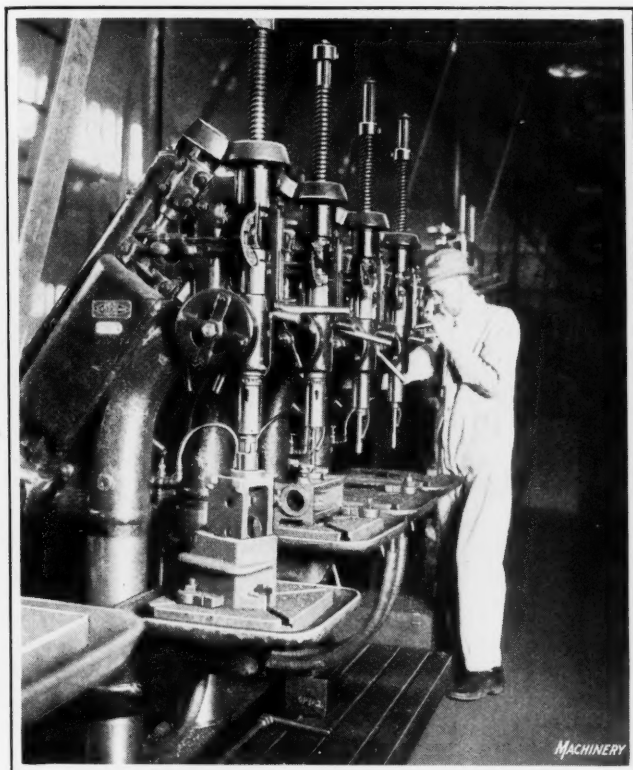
Four-spindle Gang Drilling Machine used for machining Forged Clutch Levers
